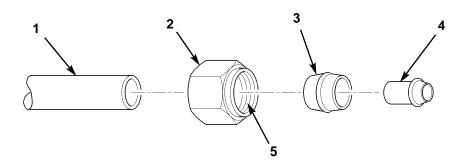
Installing Nut, Ferrule, and Sleeve Insert.
